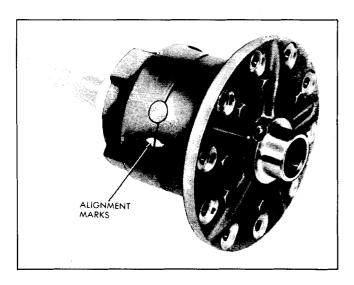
B-7 Paint on Alignment Marks Before Disassembly
